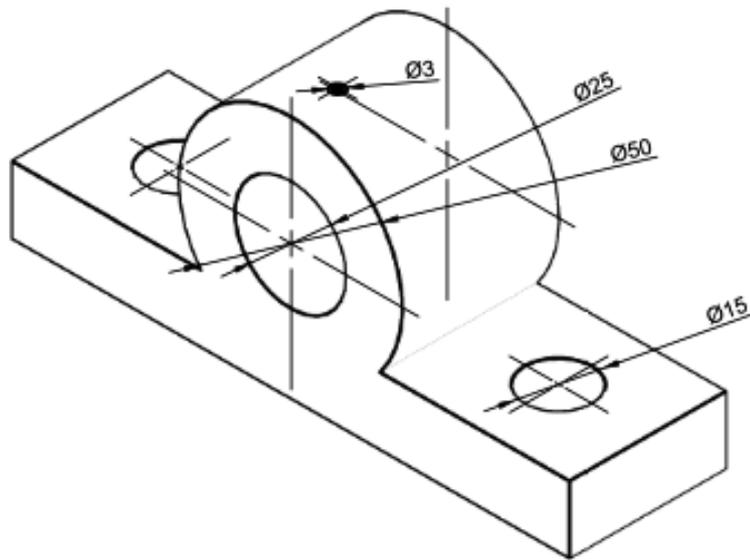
(b) 3D Model Solid Journal Bearing
